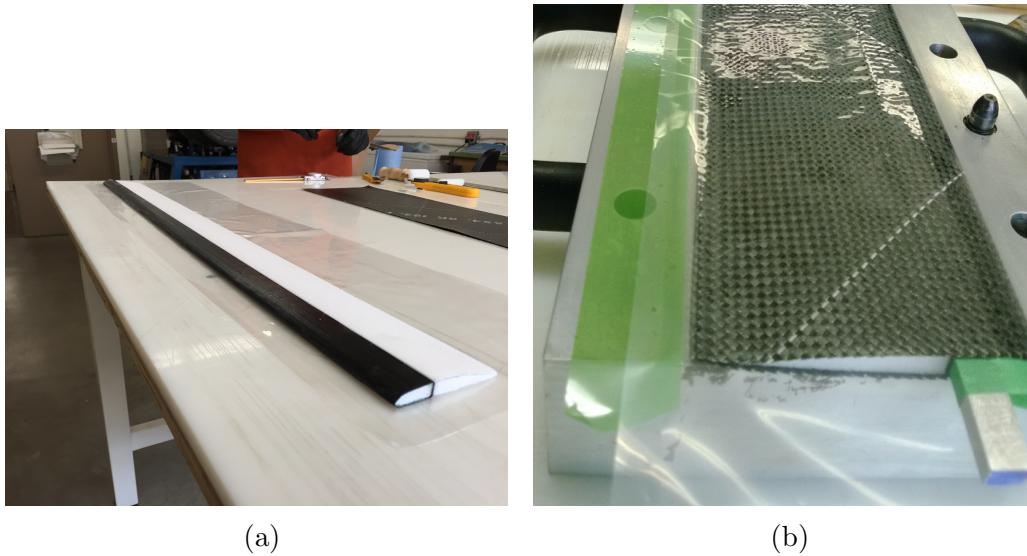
Blade construction, (a) Completed D-spar joined to aft foam core, (b) Blade wrapped with outer skin and release film in mold
